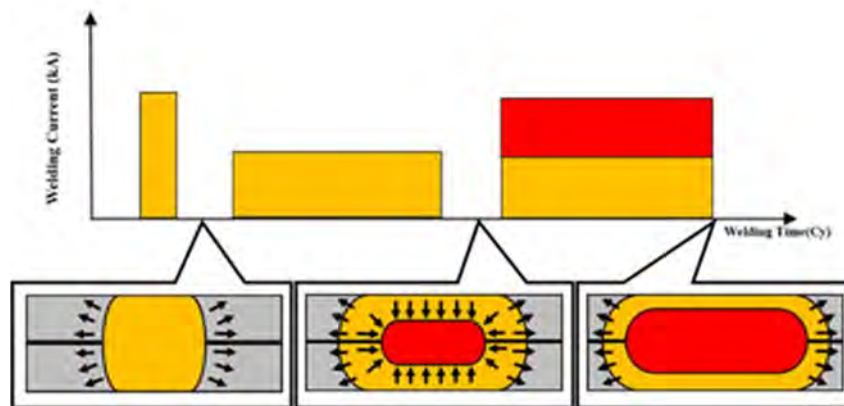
C-23: Weld growth mechanism of optimized three-pulse welding condition.^{J-2}
